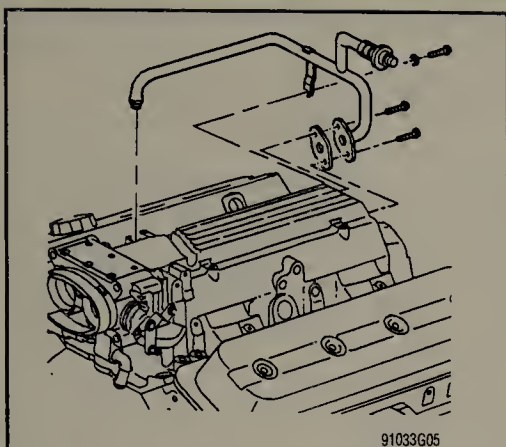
Remove the secondary air injection check valve pipe from the exhaust manifold
